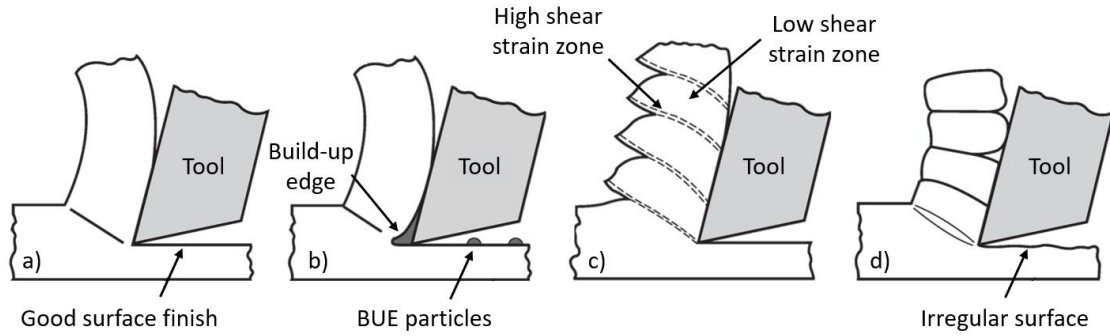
Most common chip formation mechanisms: a) Continuous chips; b) continuous chips with BUE; c) serrated chips; d) discontinuous chips, adapted from [5].
